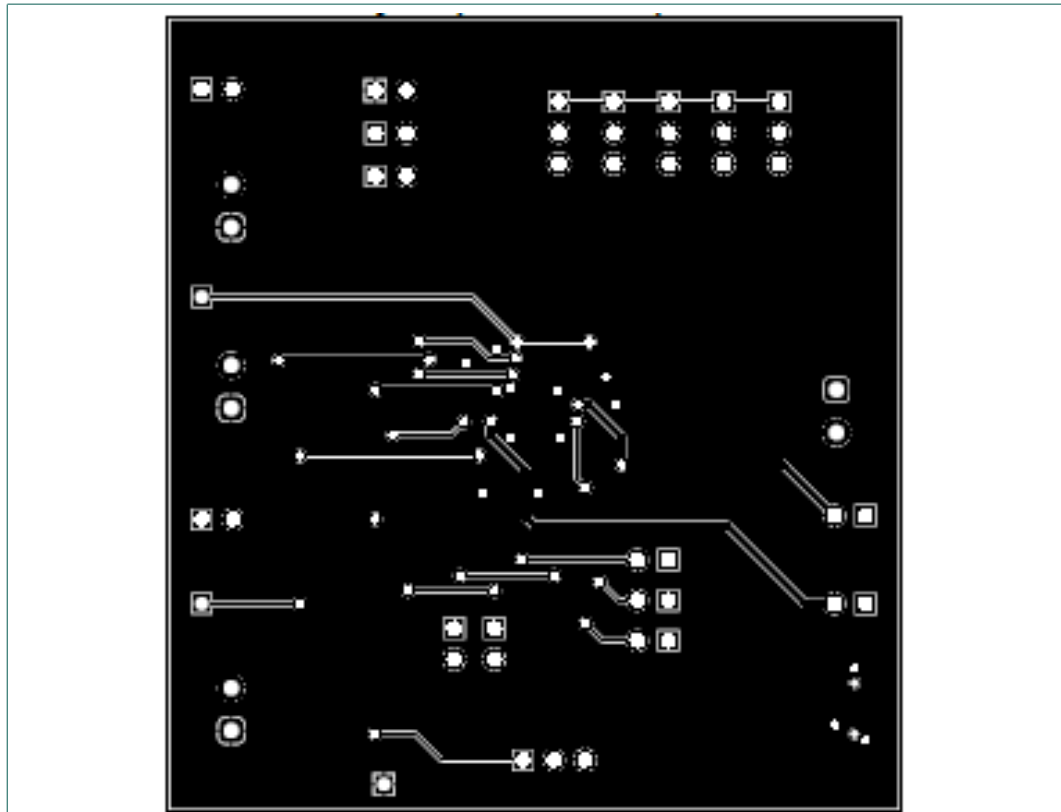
NEVB-NEH7100BU evaluation board PCB bottom layer copper
